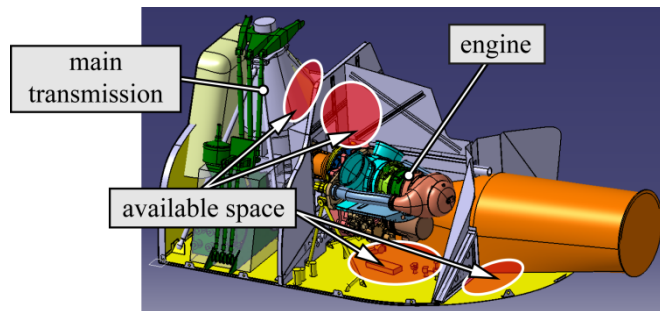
CAD model of the BO 105 engine bay for installation space analysis
